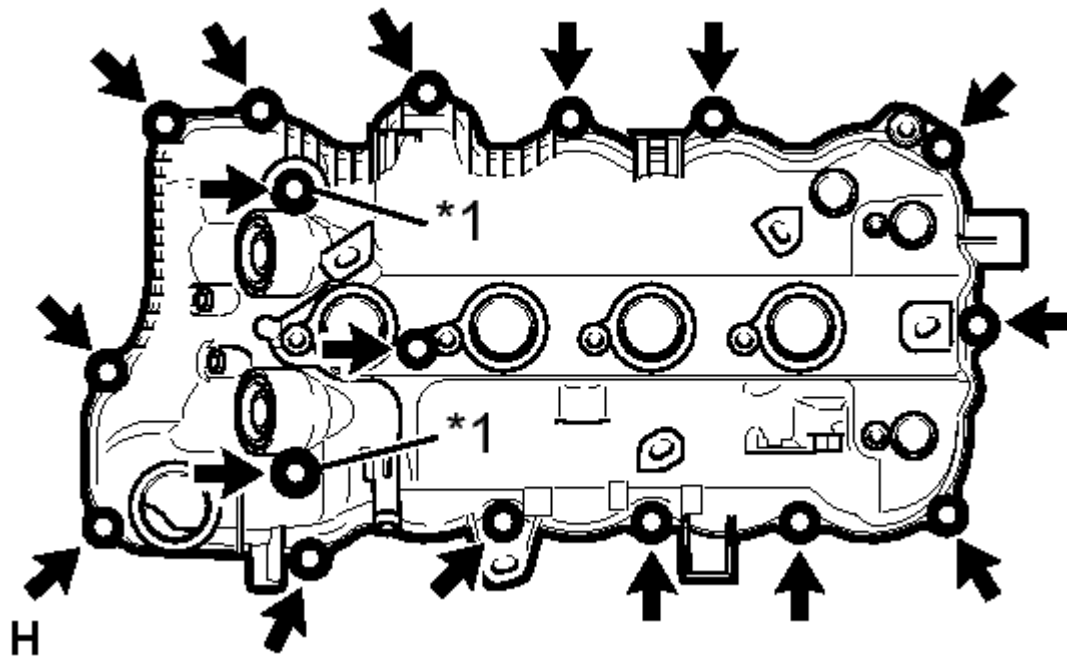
Identifying Cylinder Head Cover Bolts & Seal Washers
